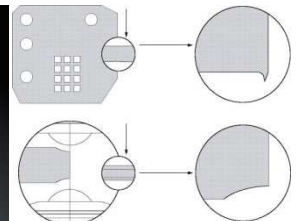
Mate Rollerball Deburr™ (above: after stamping, below: after rollerball deburring) [3]
